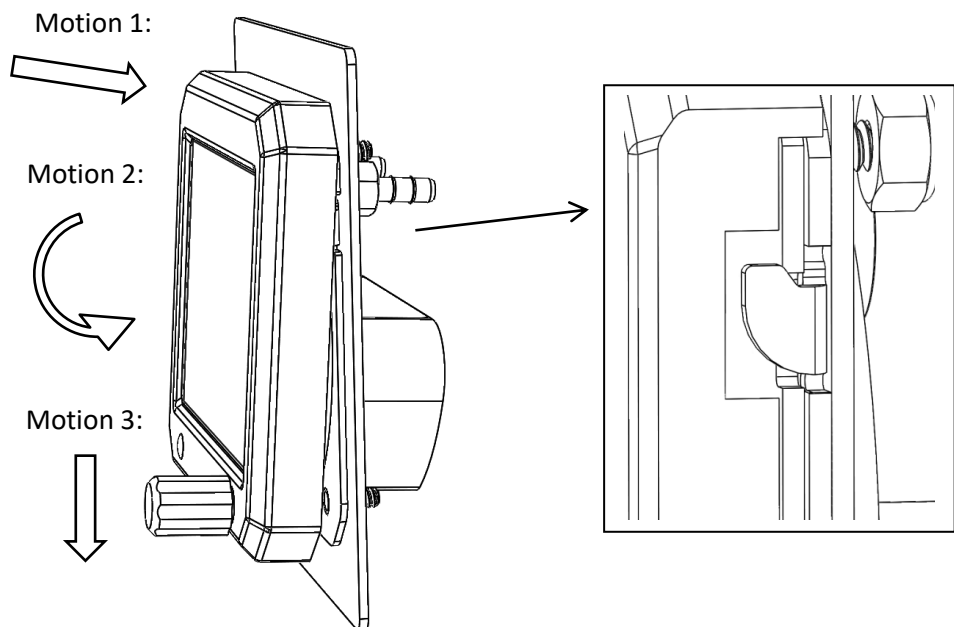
Unit Mounting With Tab/Slot Cutaway
